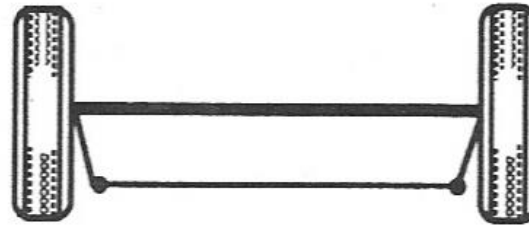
Offset attachment of steerable wheels to a trapezoidal steering mechanism.
